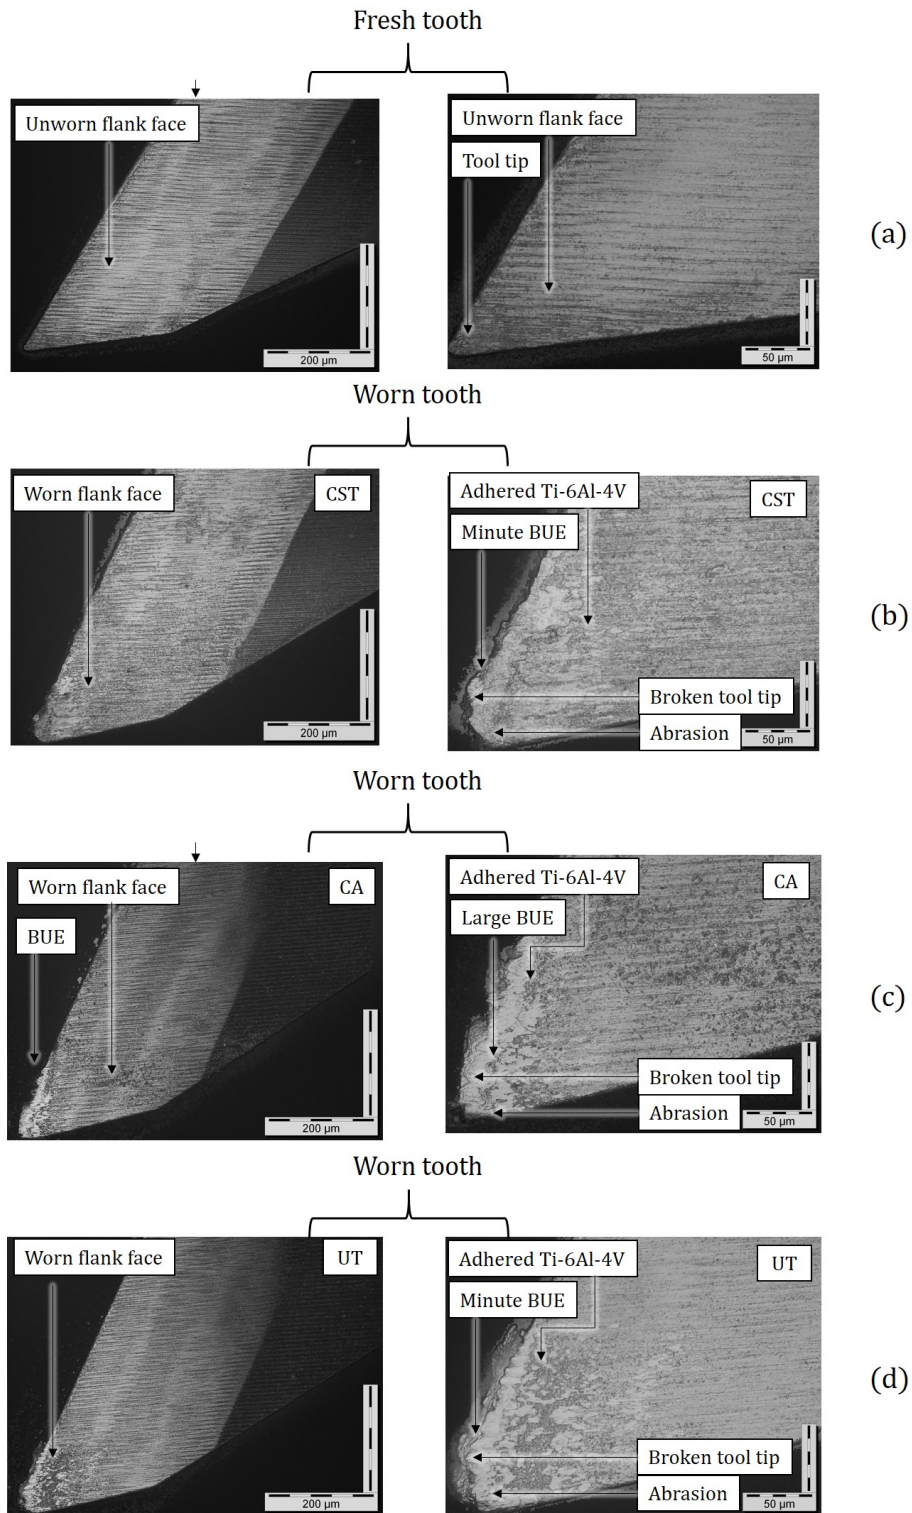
Tool morphology of fresh tooth and worn tooth after machining 13.5 sec of AC, STC and UT sample
